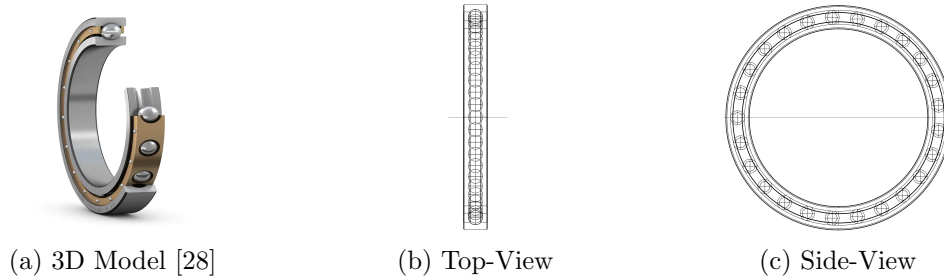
Deep groove ball bearing, SKF 61830 MA [5]
